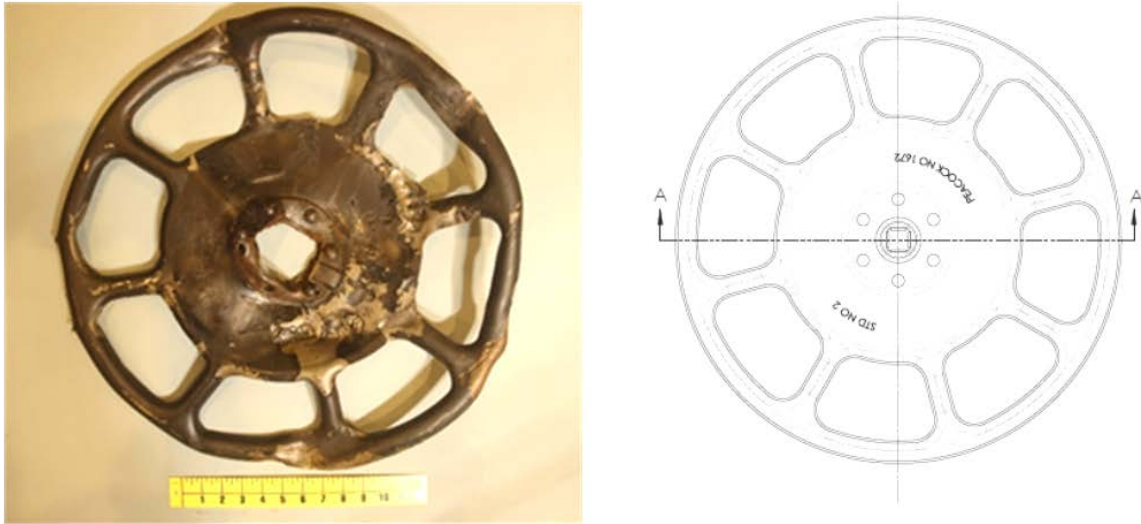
FURX 160030 brake wheel separated from hand brake nut and trunnion, and excerpt from Amsted Rail 22-inch diameter hand wheel drawing.
